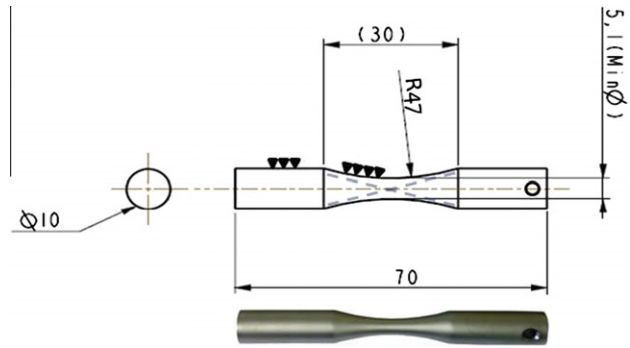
Schematic drawing of fatigue test sample geometry (dimensions are in mm) and a photographic image of a typical finished specimen.
